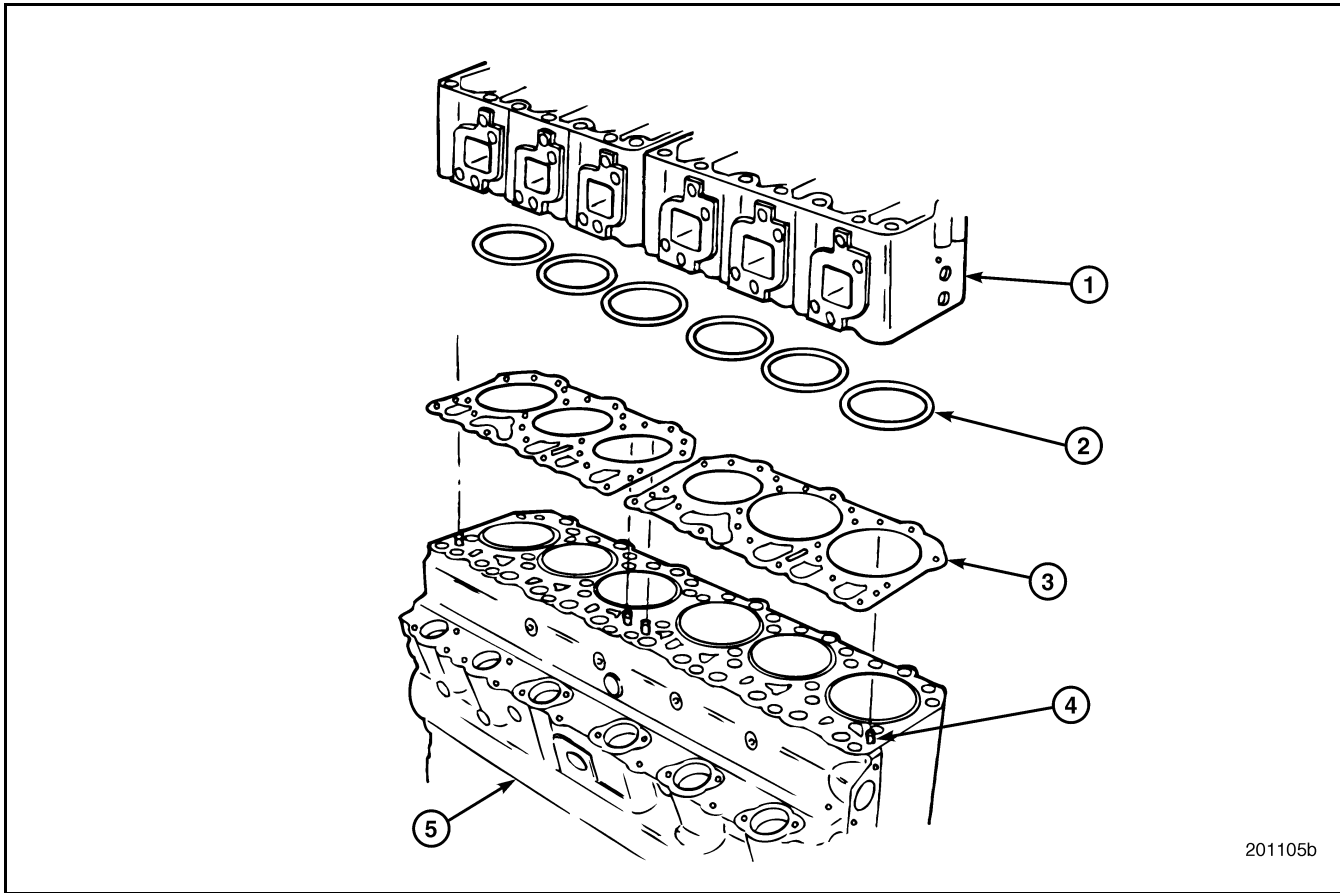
Cylinder Head Gasket and Fire Ring Positioning
